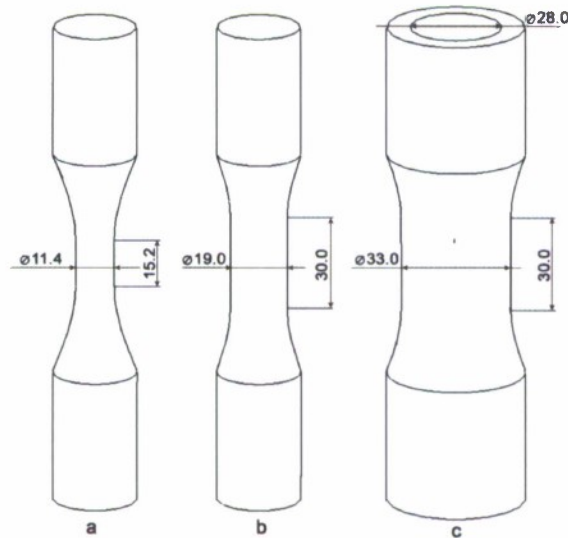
Geometry of the specimens used in fatigue experiments on AL6-XN alloy (all dimensions are in mm). a) tension-compression specimen; b) solid shaft specimen; c) tubular specimen
